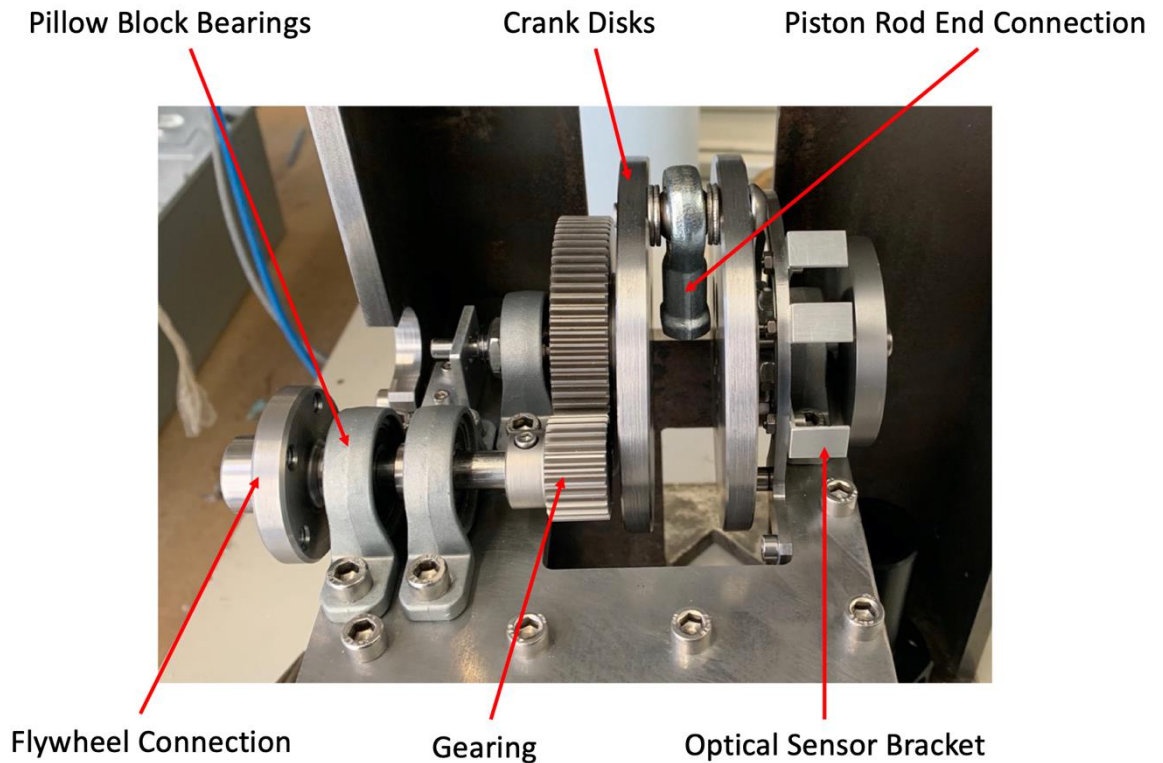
MK.III engine crank shaft during assembly. Note that the flywheel, vacuum pump connecting rod, and piston rod are not shown in this image.
